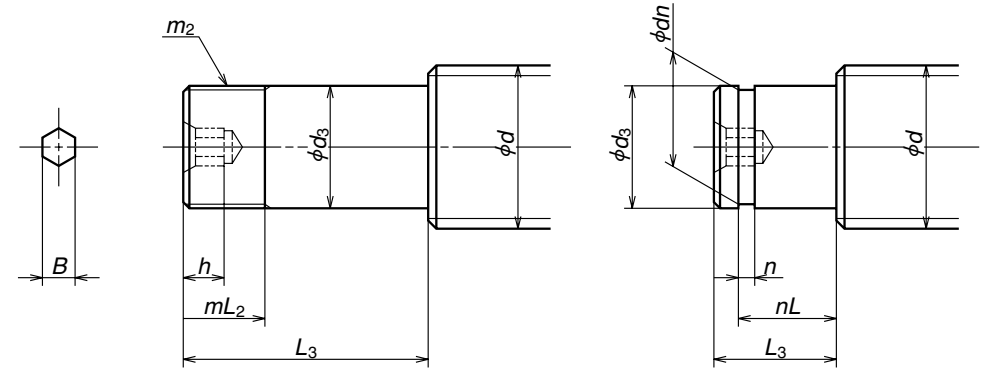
Standard shaft end configuration (opposite to the drive side)
